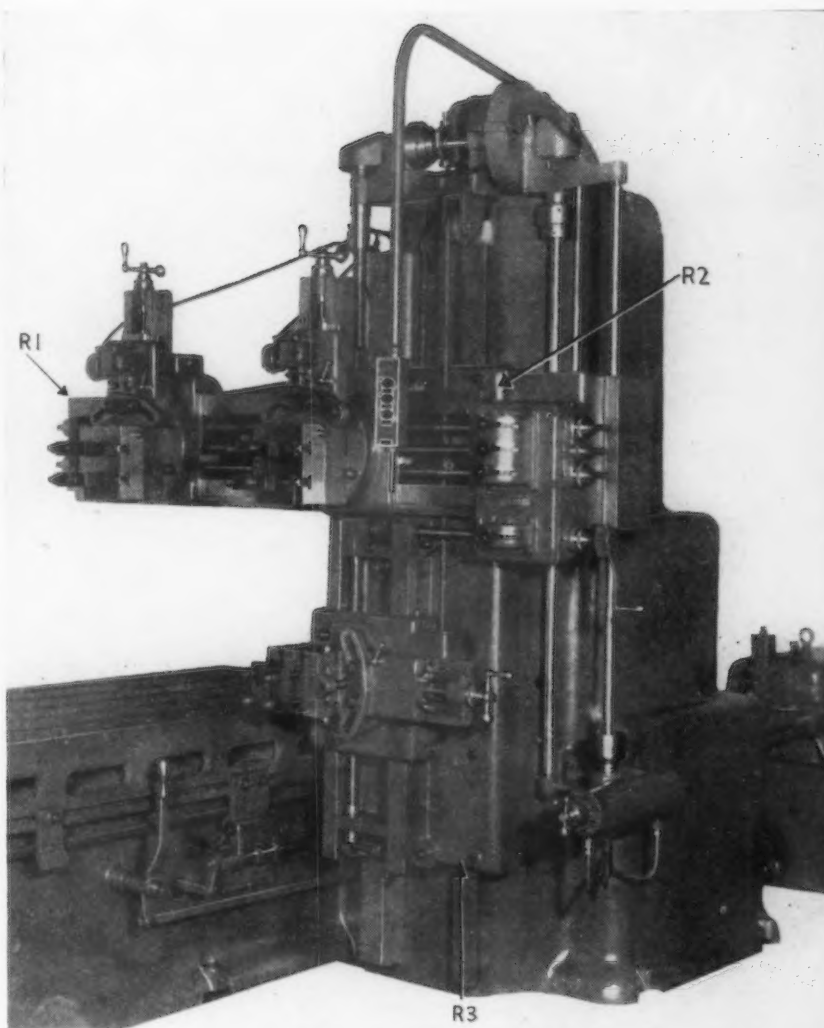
Further details of hydraulic planer construction and control, including an outlining of the inverted-L form of the large rails casting as described, are shown here.
